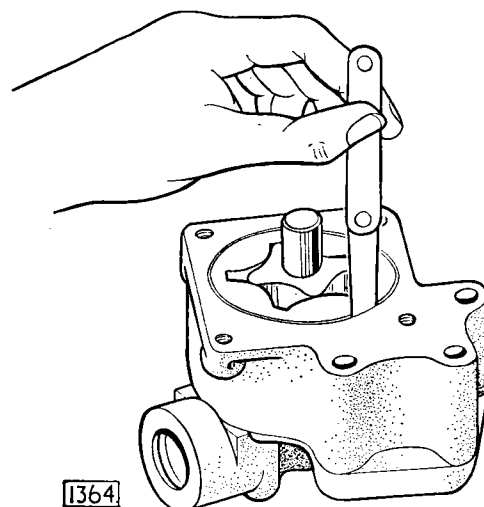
Measuring the clearance between the outer rotor and the pump body
